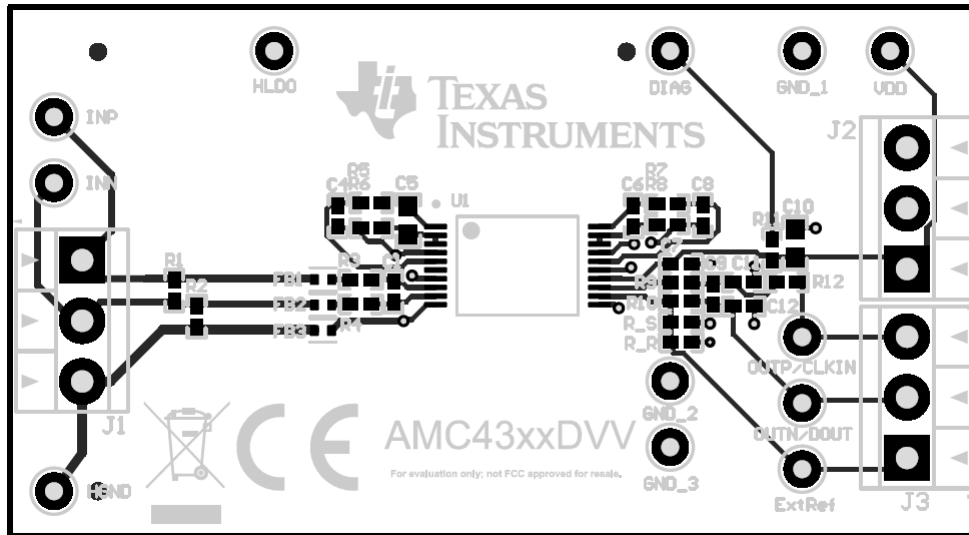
AMC43xxDVVEVM Top PCB Drawing
